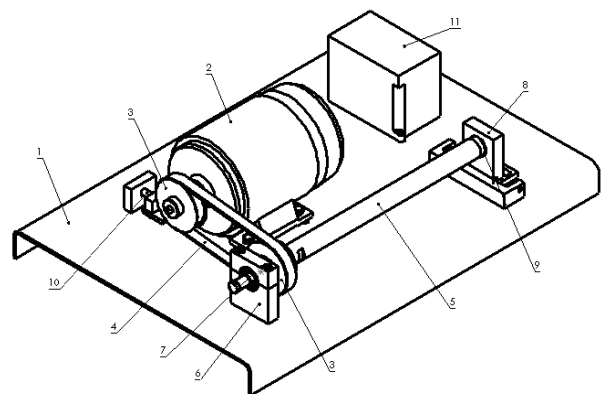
Drawing of the bearing test rig (1 - Base plate, 2 - Drive electric motor, 3 - Belt pulley, 4 - Timing belt, 5 - Shaft, 6 - Bearing housing, 7 - Bearing 1 (the bearing under test), 8 - Plain bearing housing, 9 - Plain bearing, 10 - Tensioner, 11 - Frequency regulator)
